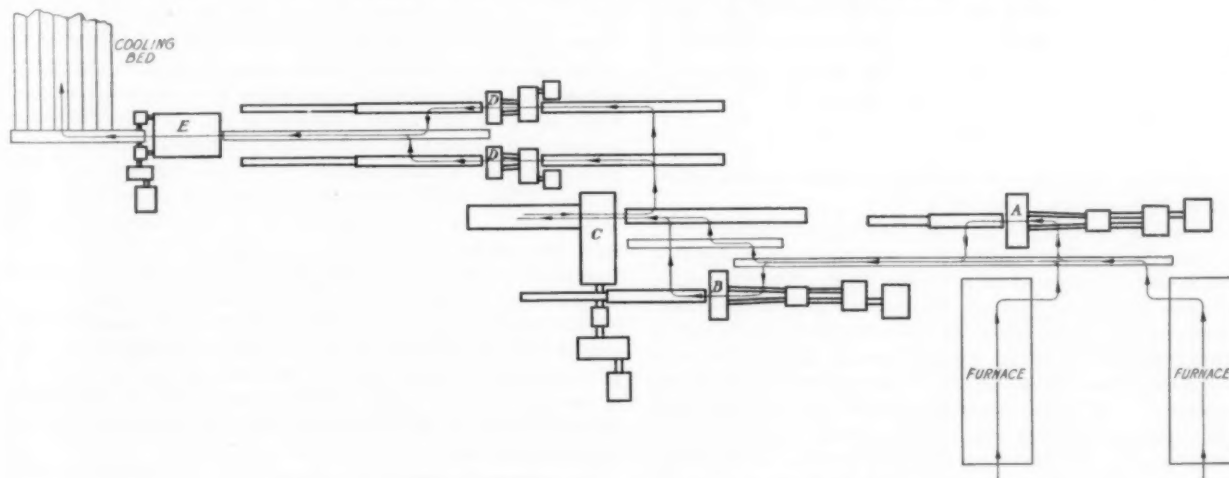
DIAGRAMMATIC LAYOUT OF A SEAMLESS-TUBE PLUG-MILL UNIT
